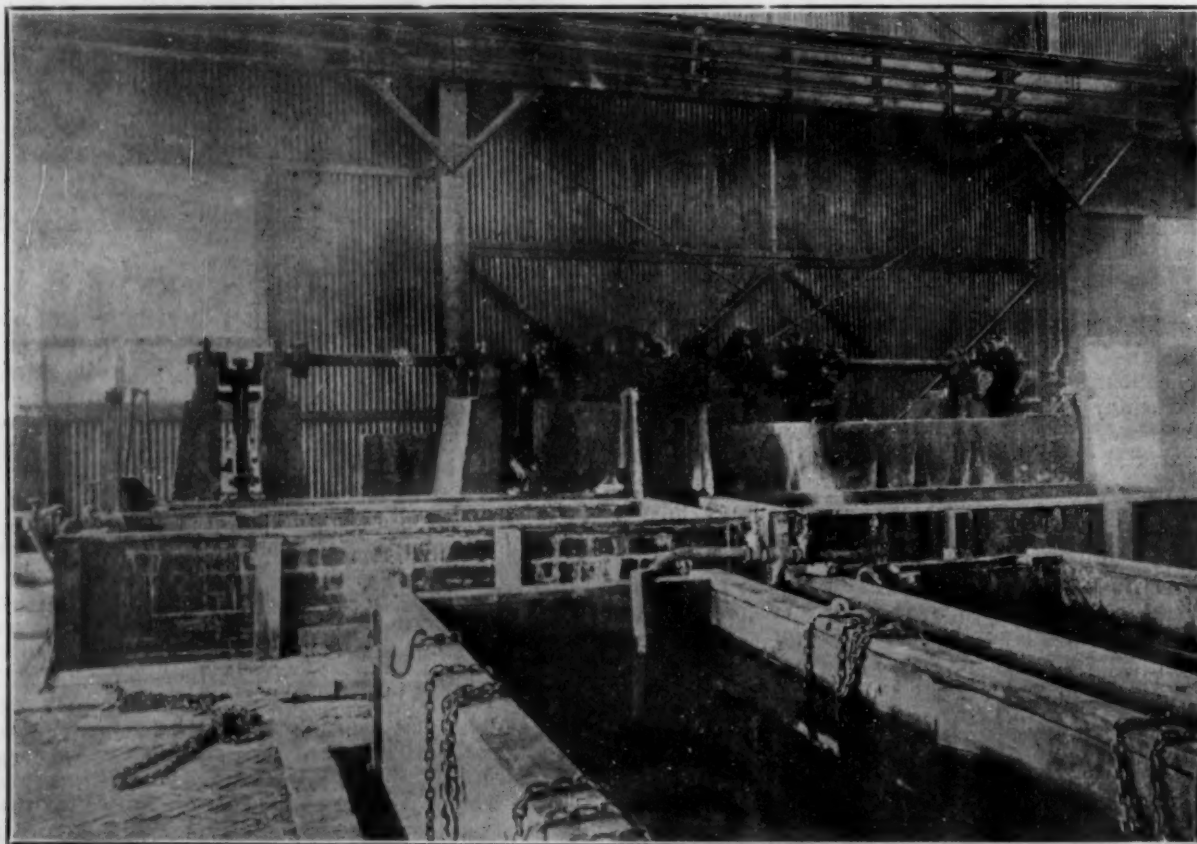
FIG. V. LAYOUT OF ZINCING BATH AND ARRANGEMENT FOR LEADING SHEET IN AND OUT
